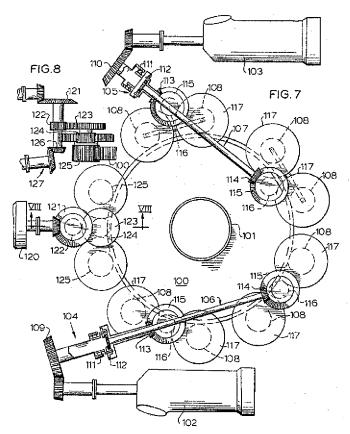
illustrates a third engine 120 and a tail rotor take off shaft 127 in a side view having a top view which appears generally similar to the top view of drive pinion 116 in Figure 7. *Figures 7 and 8 in no way disclose or suggest a radially unsupported pinion shaft.* Furthermore, no where within *White* is a radially unsupported pinion shaft disclosed or suggested by drive pinion 116 or what appears to be equivalent drive pinion 124. Applicant respectfully suggests that *White* fails to disclose or suggest a radially unsupported pinion shaft, said floating pinion gear mounted for rotation about a floating pinion axis of rotation which provides a resilient characteristic as recited in Applicant's claim 1. Since *White* fails to disclose or suggest this particular limitation, the rejection is thereby defeated. The claims are properly allowable over *White*.
